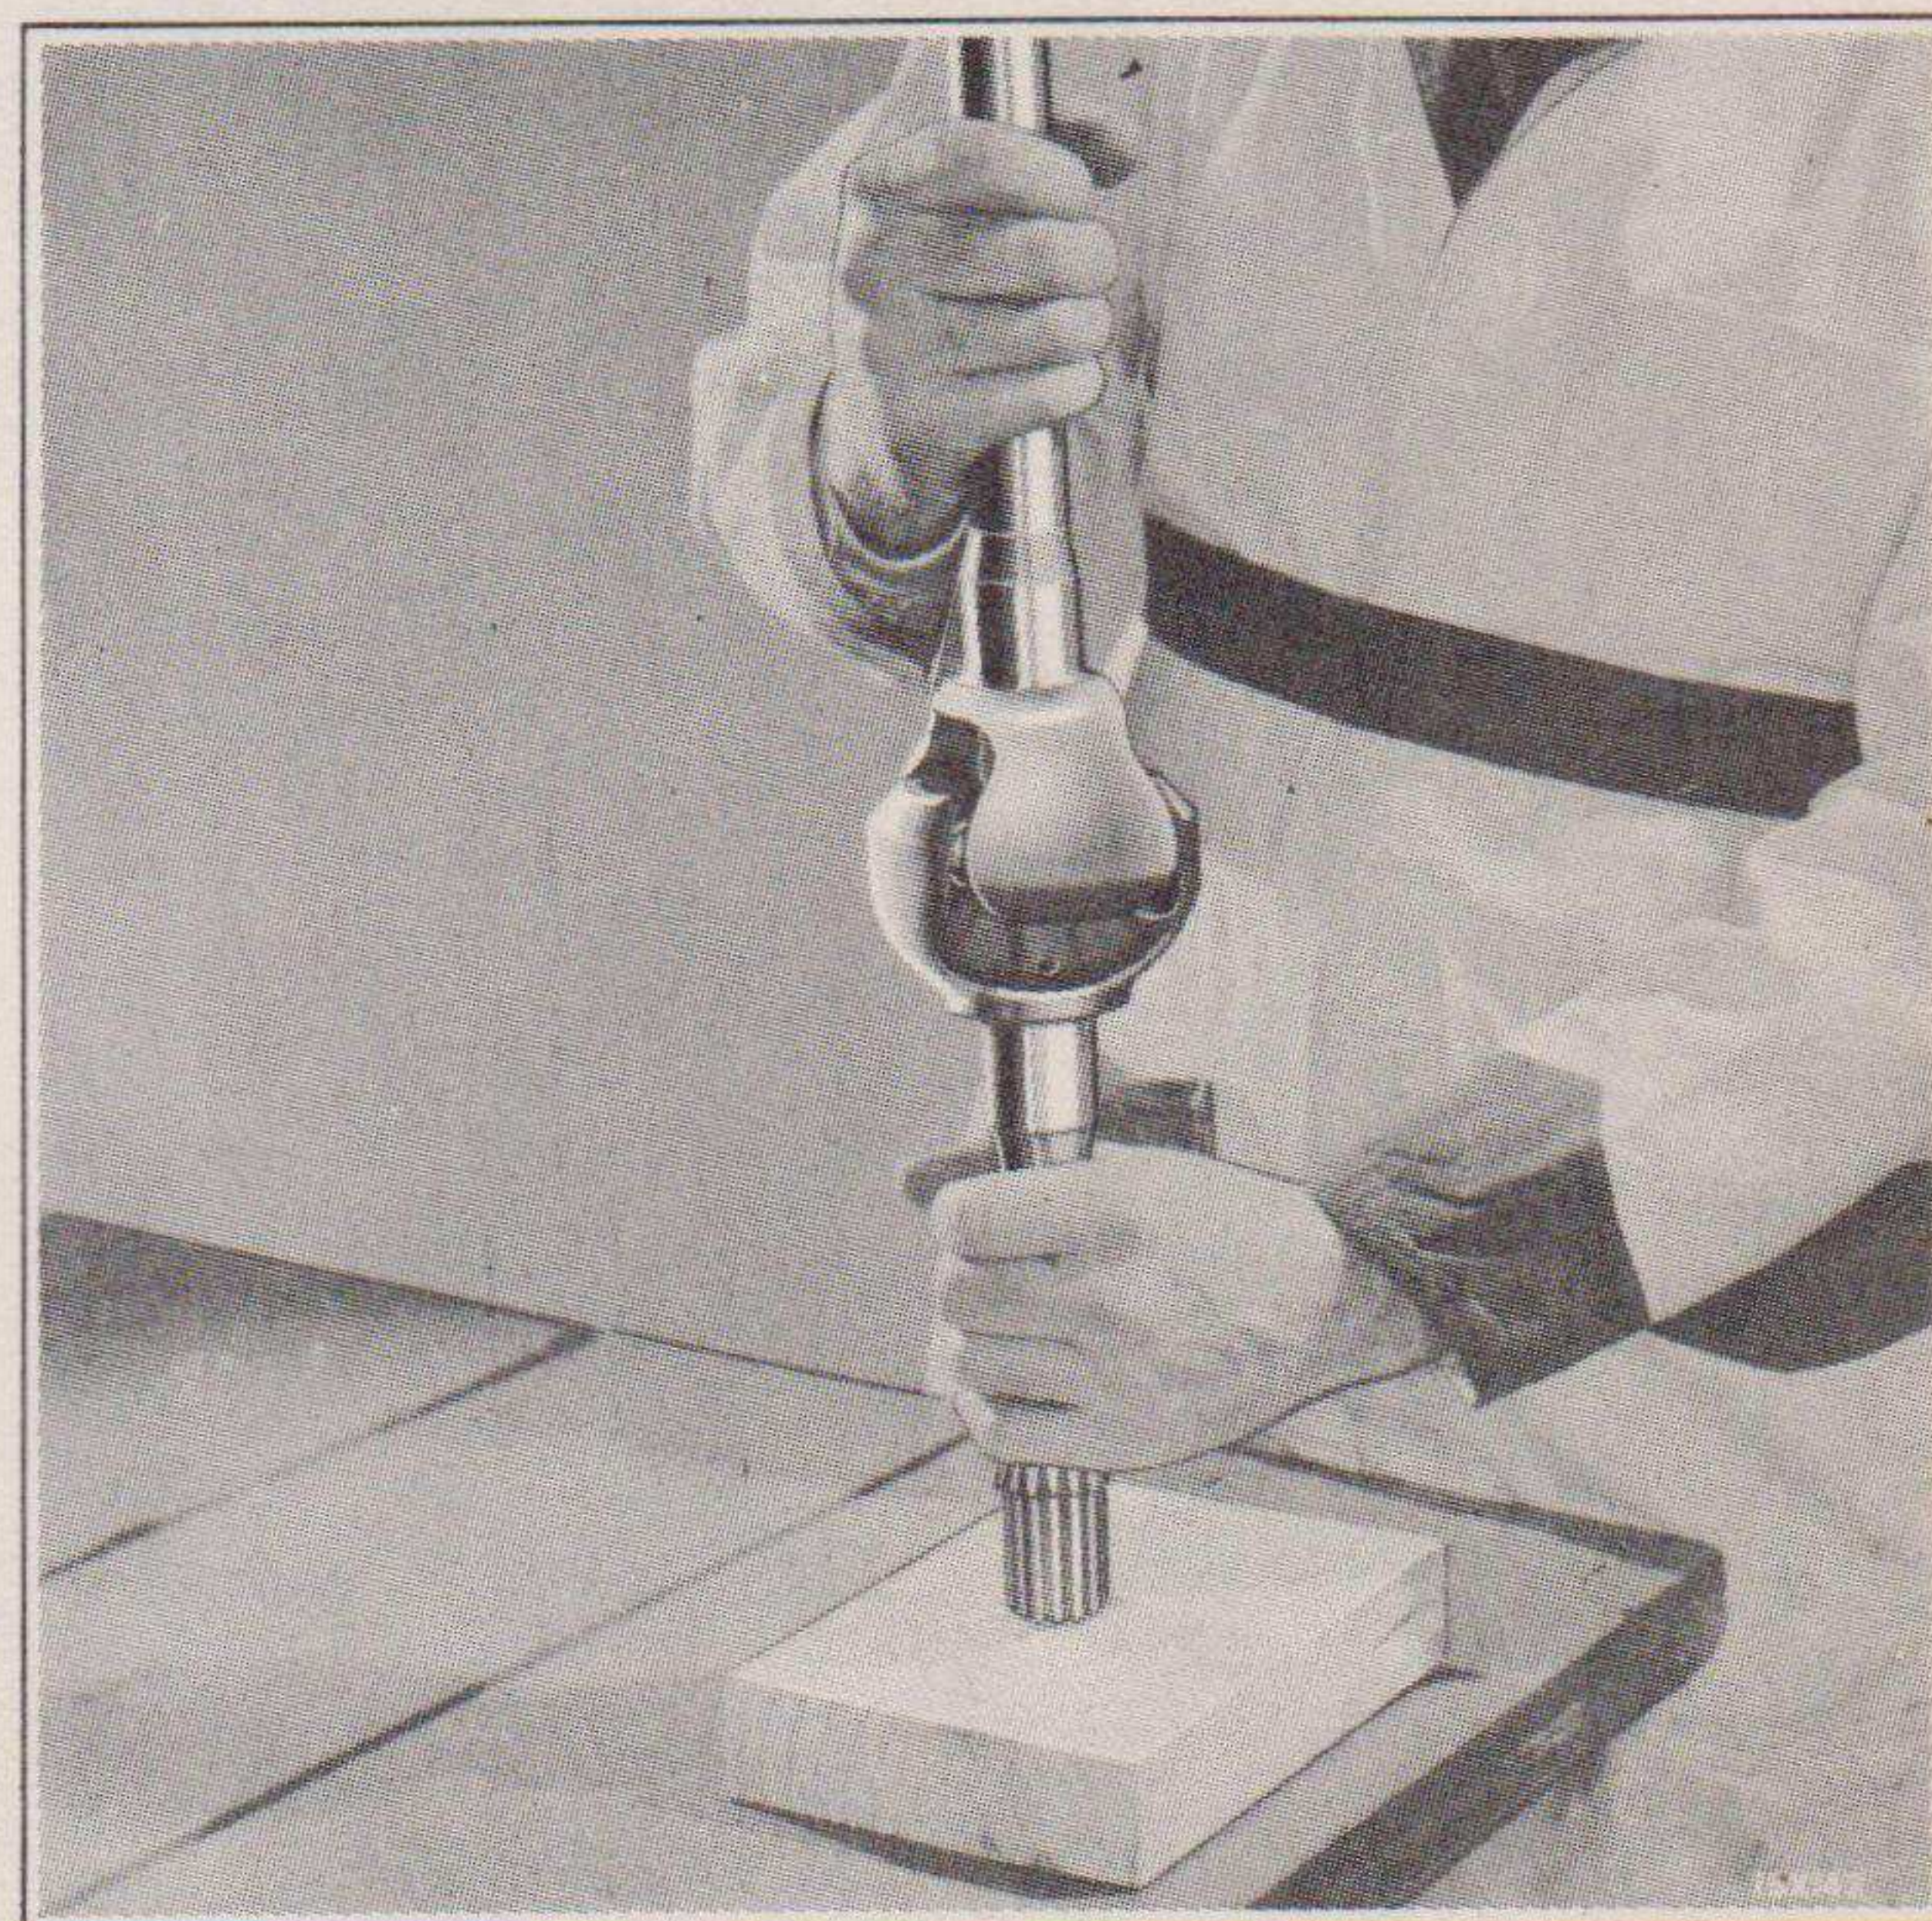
Dislodging Universal Drive Center Ball Pin
